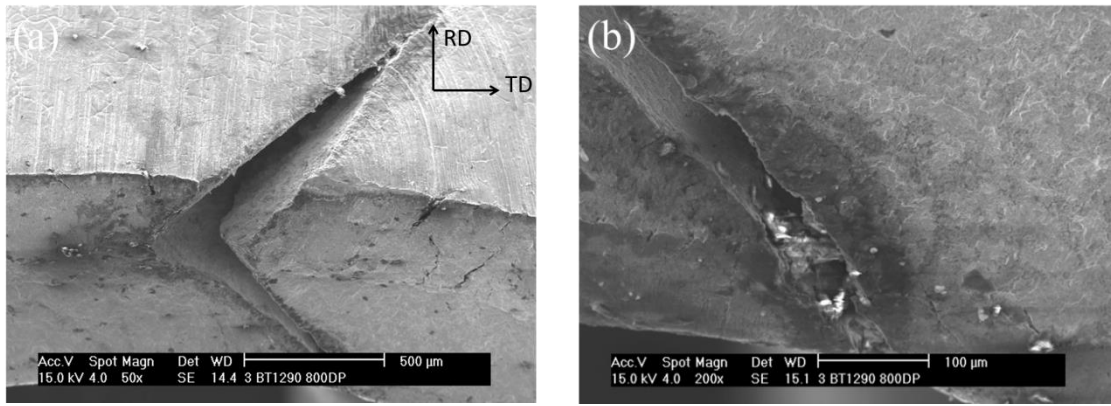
SEM images of cross thickness fracture on DP800 hole expansion sample
